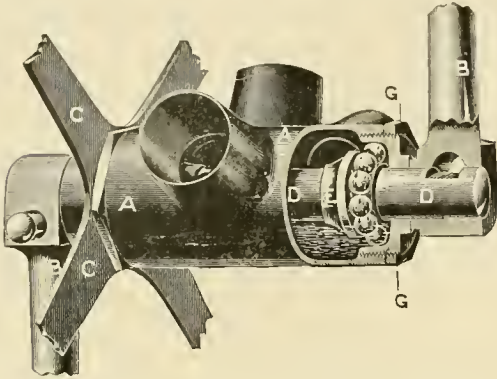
DISC- (OR CUP-) ADJUSTING CRANK-BEARING (CENTAUR).
